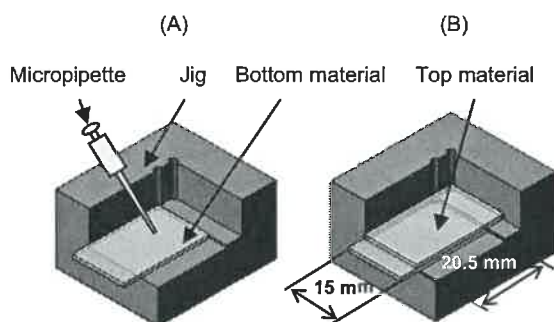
The pieces are bonded using a jig for alignment. (A) The bonding solution is dispensed on the bottom piece. (B) The top piece is placed on the bottom substrate.
